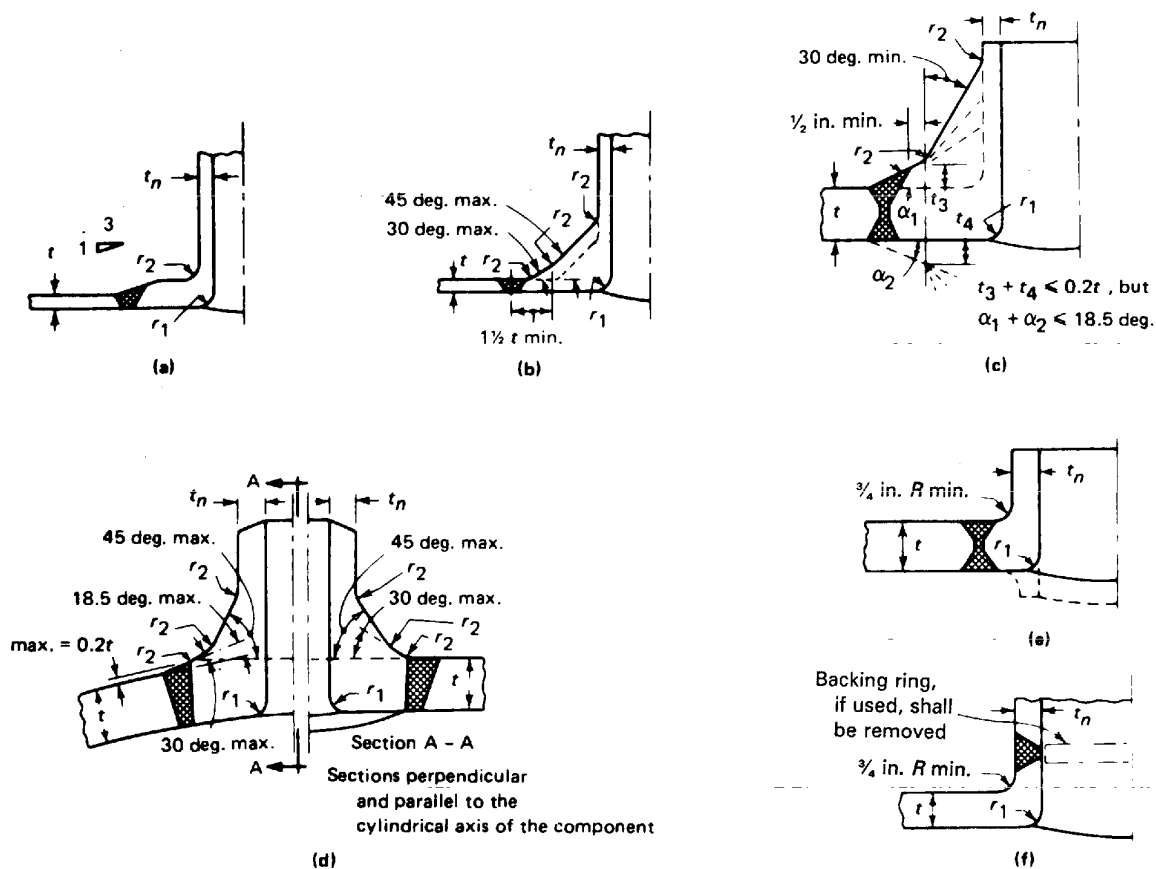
ACCEPTABLE FULL PENETRATION WELD DETAILS FOR CATEGORY C JOINTS (NB-3352.3)
